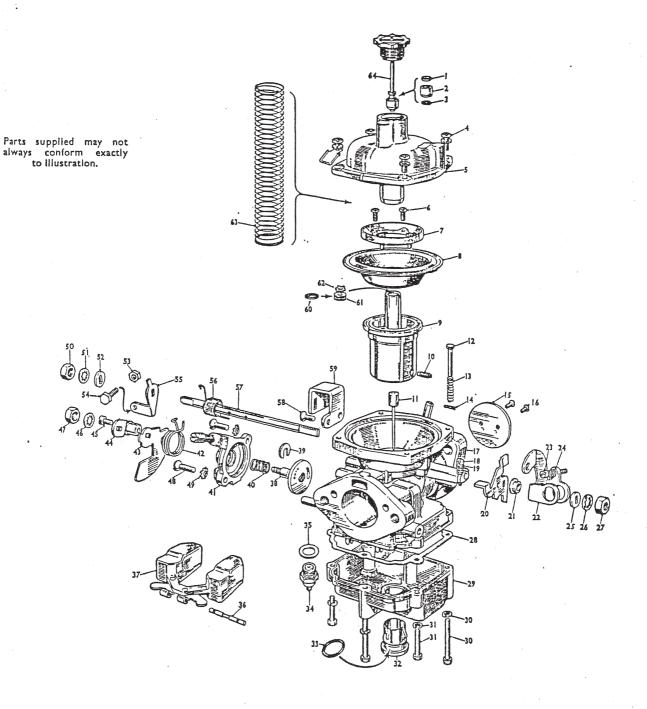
Explosion view of 150 CD-3 carburetor
